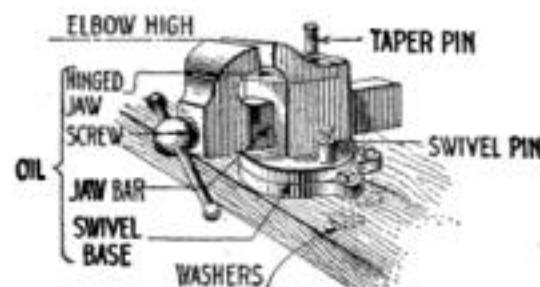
A typical vise of the machinist's type and points where it should be oiled
